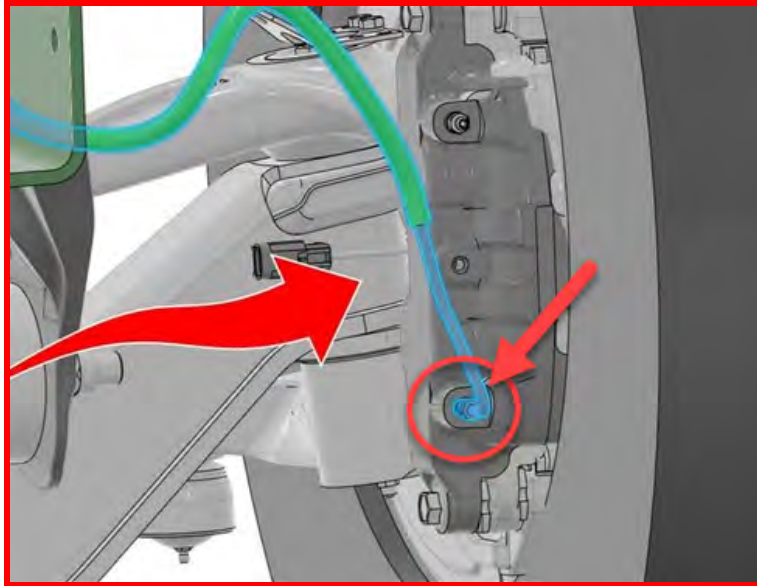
Rubber Brake Hose-to-Caliper Fitting
